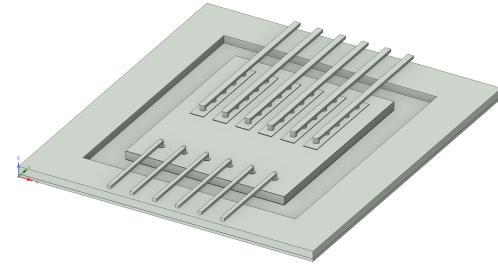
PCB based embedded package with a single GaN SoC - Internal View.
